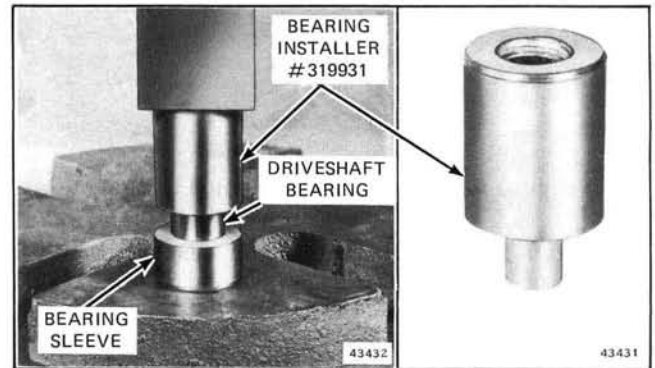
Installing Driveshaft Upper Bearing in Sleeve
